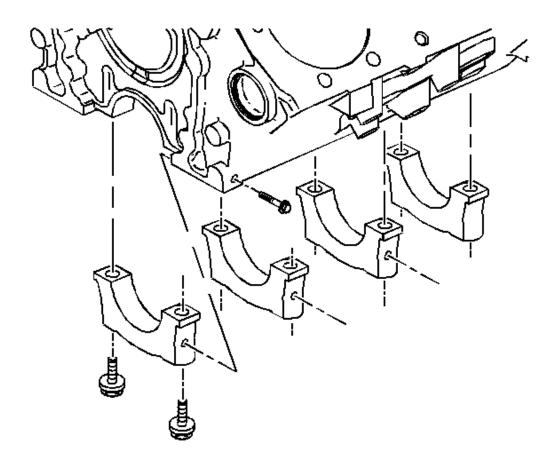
Crankshaft Main Bearing Cap & Bolts Courtesy of GENERAL MOTORS CORP.
